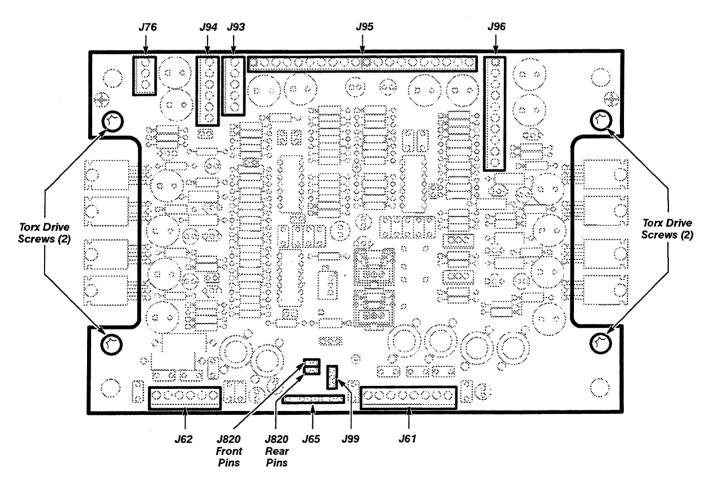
Removing/Replacing the A4 Regulator Board
